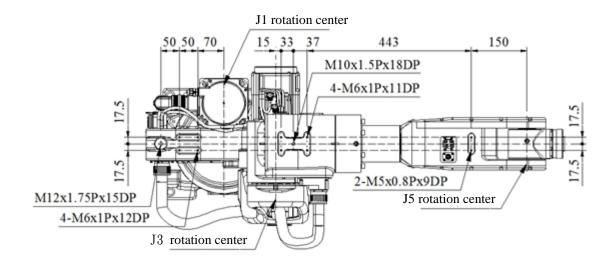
(c) RA610-1476-GB Mounting surfaces on the robot RT610-1476-GB Mounting surfaces on the robot
